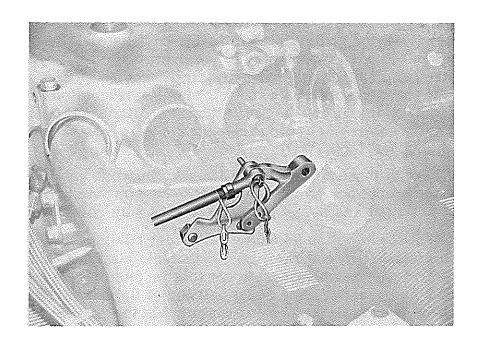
Fixture ST-319 Installed and Showing Cross Shaft Control Lever in Closed Throttle Position
